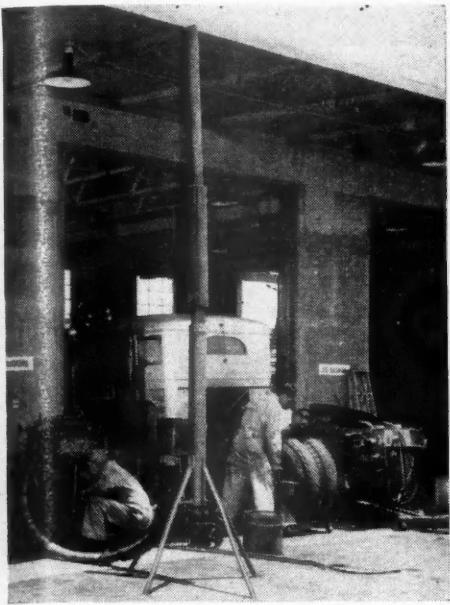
Even though engine test stand is mounted outside, flexible line and stack carry fumes through roof canopy
